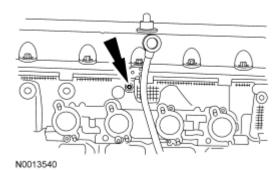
Oil Level Indicator Tube Bolt Courtesy of FORD MOTOR CO.
